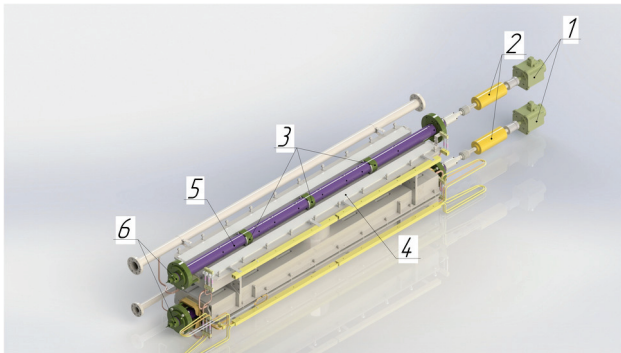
Layout of equipment for warm MM: 1. Servomotor, 2. Slip rings, 3. Plain bearings with tefflon liner, 4. Bottom part of yoke, 5. Measurement shaft, 6. Angle encoder.
